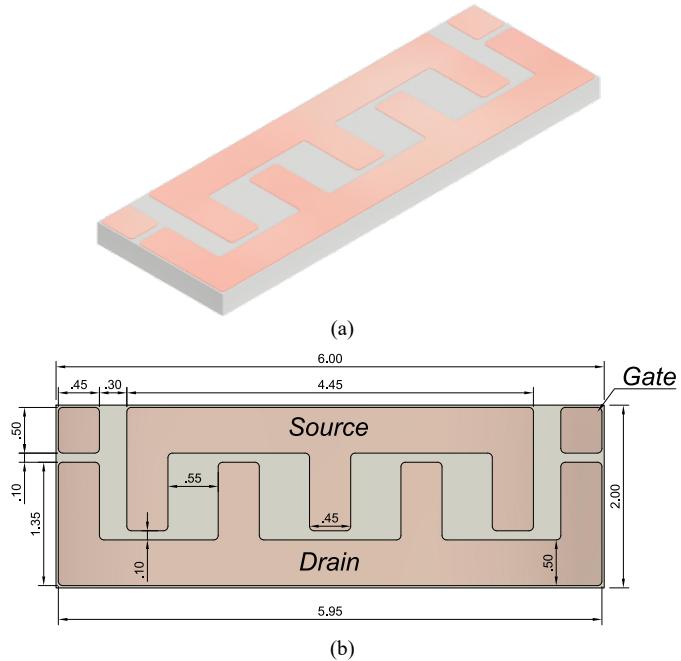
Bare die of the GaN device to be packaged showing (a) rendered 3D model and (b) dimensions of the top pads of the chip in millimeters.
